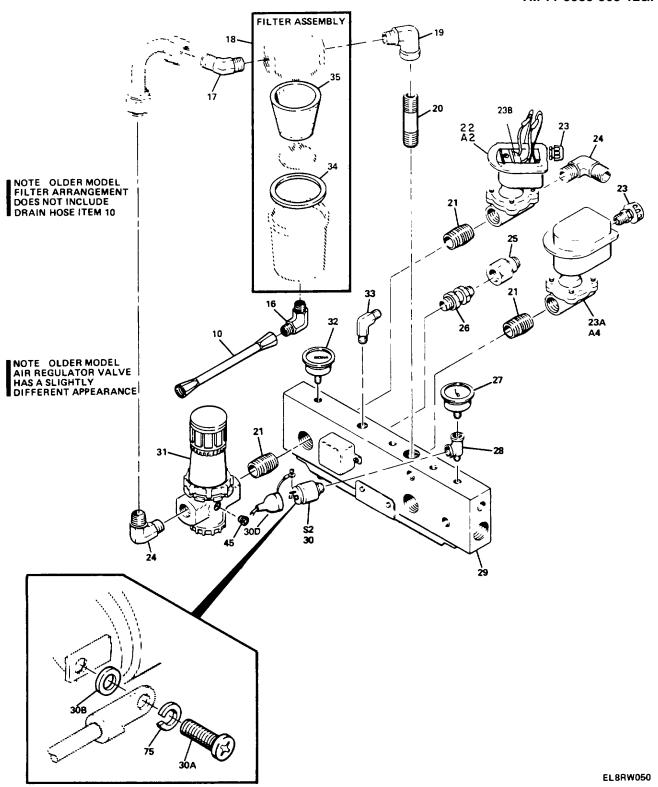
Pneumatic Component Assembly MX-10203/G (Sheet 2 of 3)
